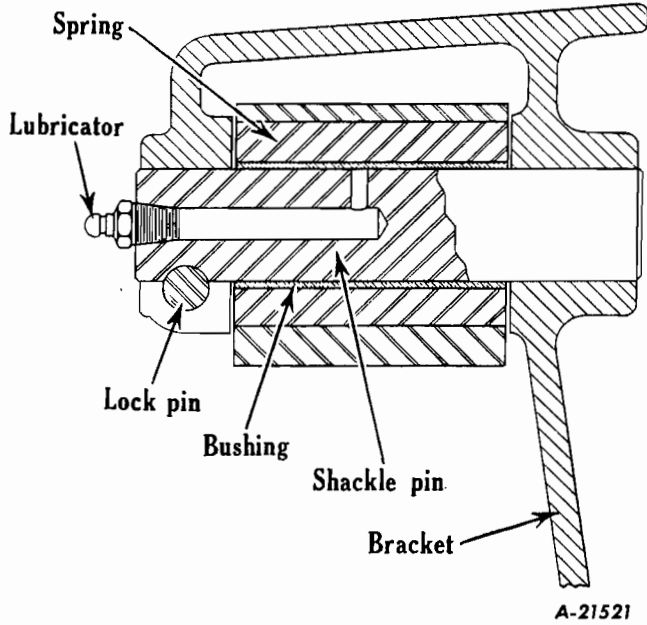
Rear Spring Front Bracket for Models L-194, L-200, L-204, L-205, L-210.
